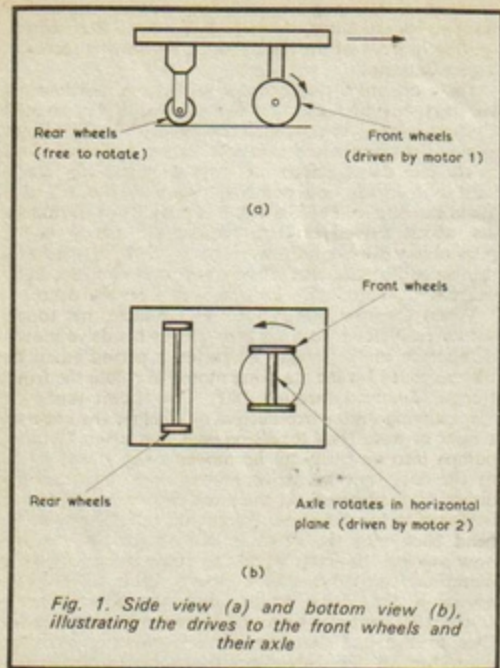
Side view (a) and bottom view (b), illustrating the drives to the front wheels and their axle
